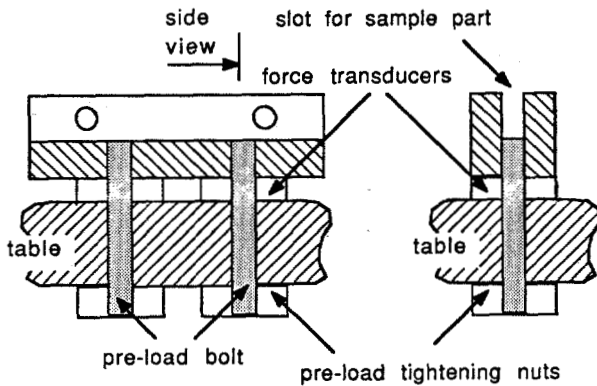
A Fixture to Hold the Straight Edge Sample Part
